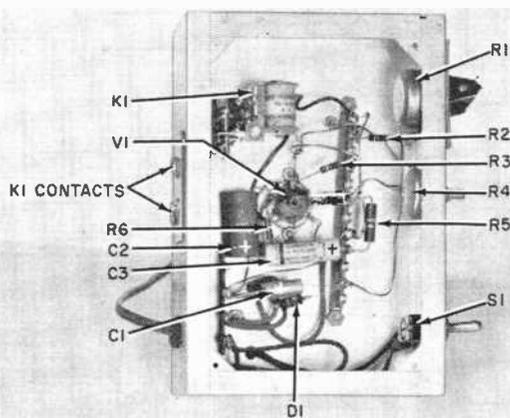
Bottom view of the thermostat, showing placement of parts. Wiring is not critical.
